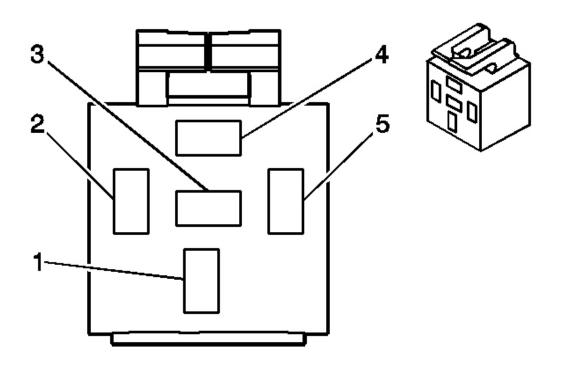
High Speed Blower Motor Relay Connector End Views Courtesy of GENERAL MOTORS CORP.
